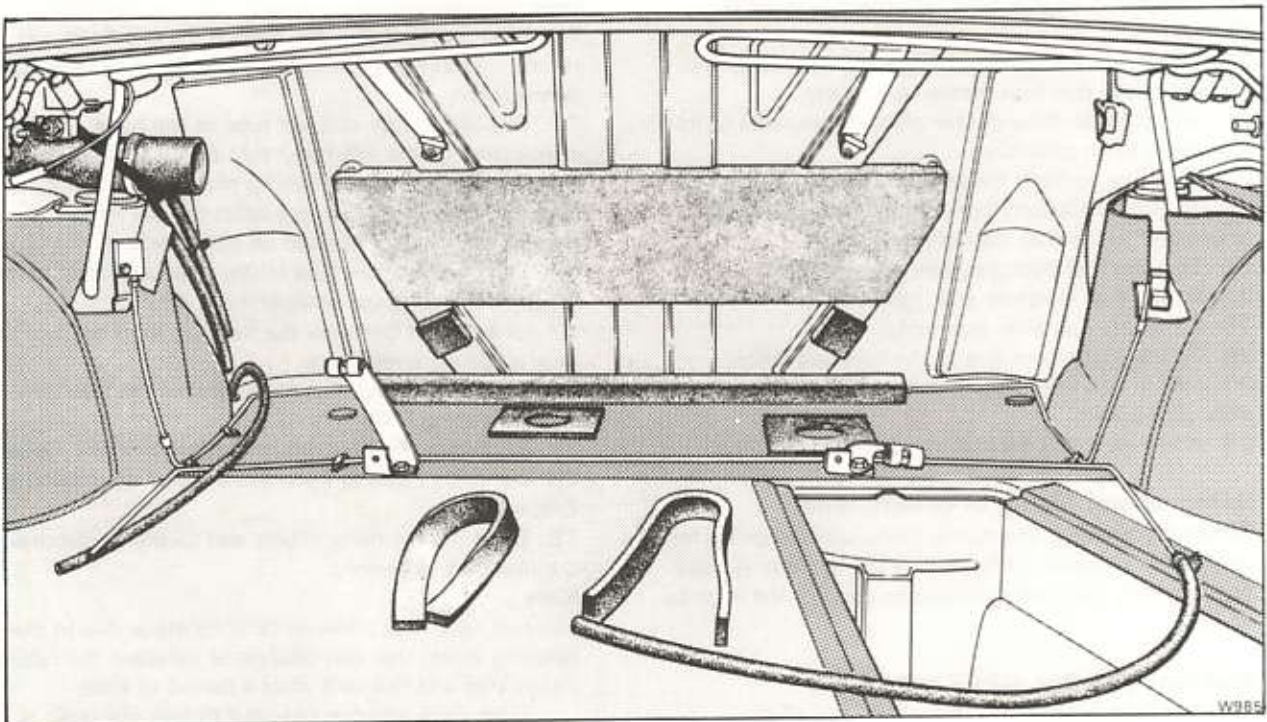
Fuel tank mounting pads and straps (all cars other than Convertibles)
